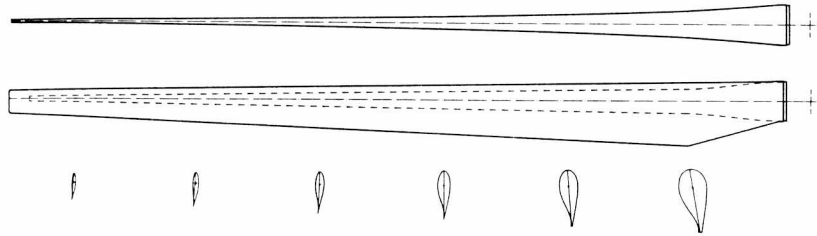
Taper and twist. Rotor blades on conventional wind machines often taper from the root where the blade attaches to the hub, to the tip. This saber-like shape minimizes solidity. Depending on the size and its construction, the blade may also be twisted to optimize performance along its entire length. (Vestas DWT)
